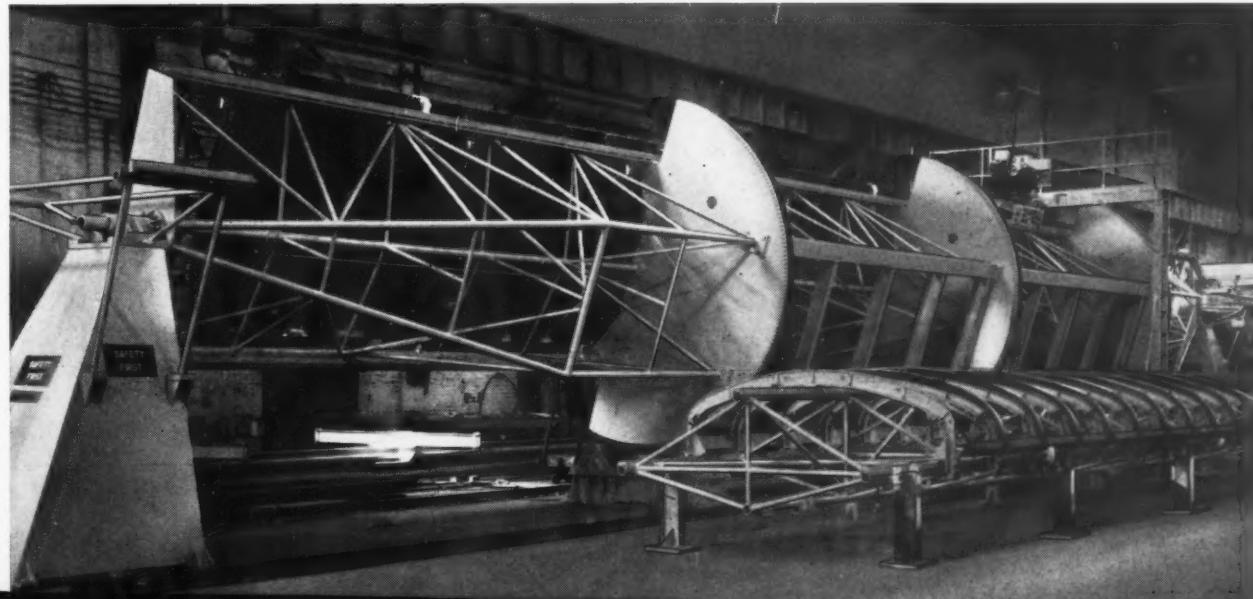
Three positioners are used to turn hopper cars so that "down-hand" welds can be made on the bottom and two sides. The time required for welding in each position is only fifteen minutes
